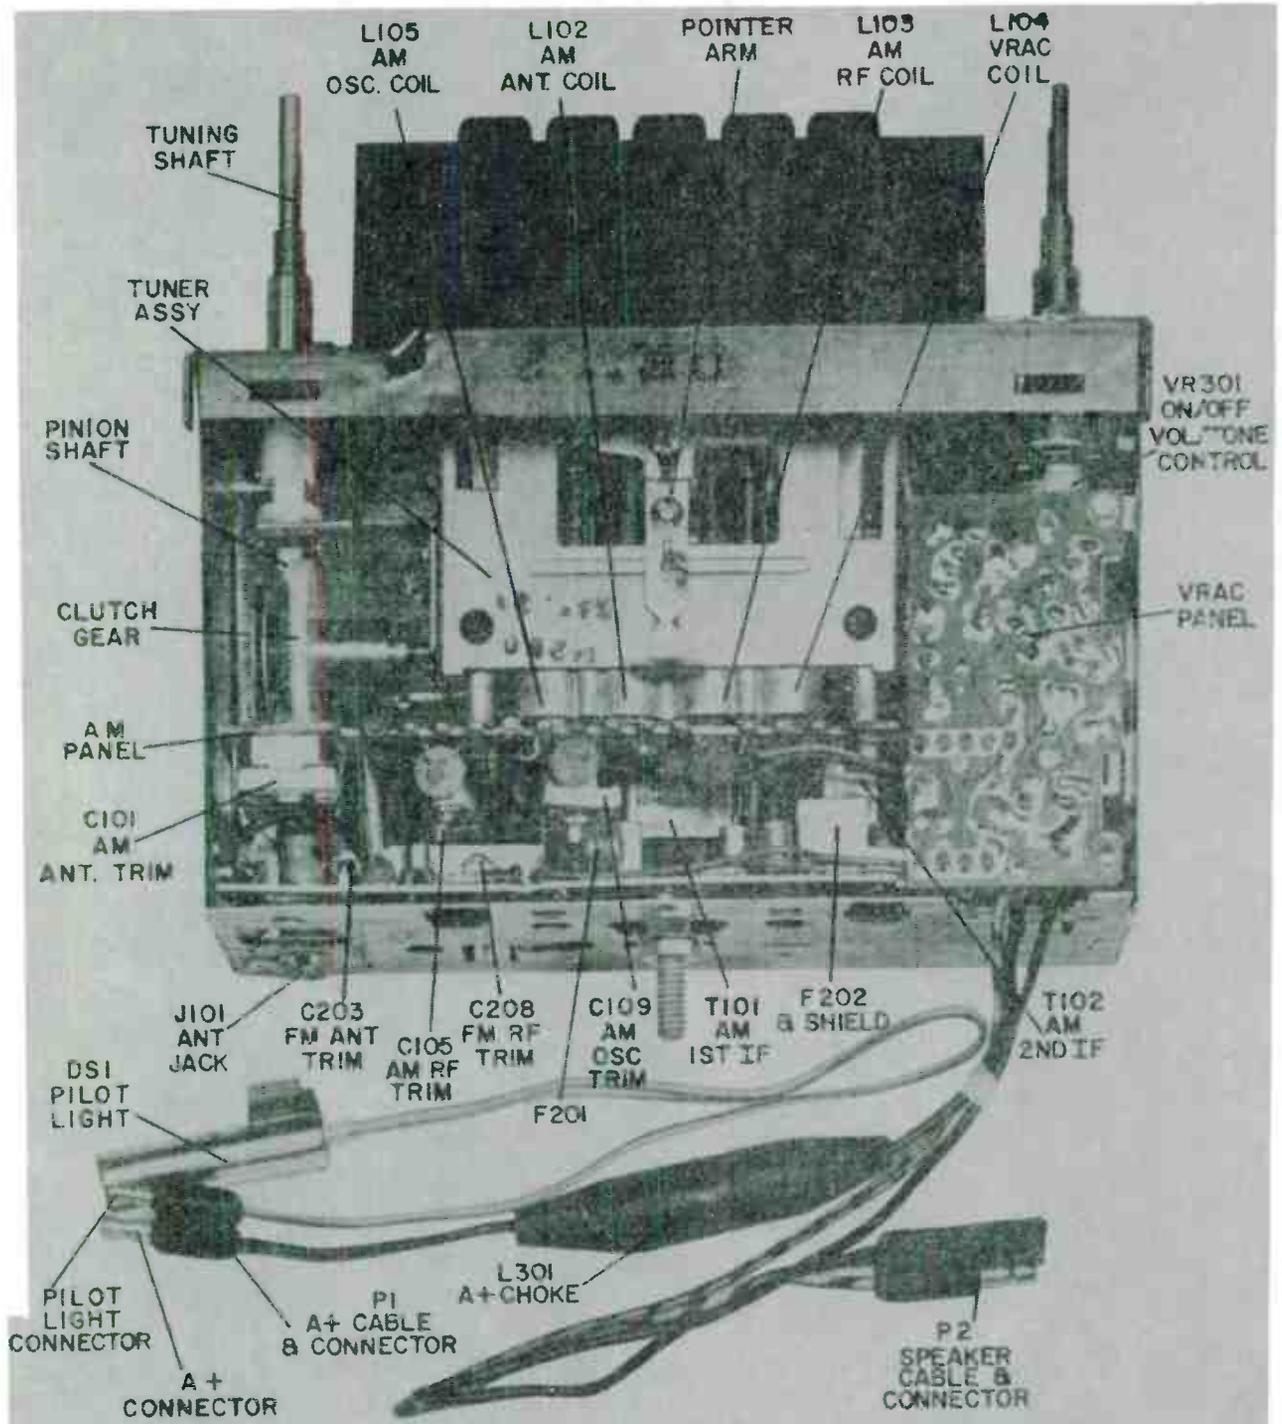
TOP CHASSIS VIEW - ALIGNMENT AND COMPONENT LOCATION
